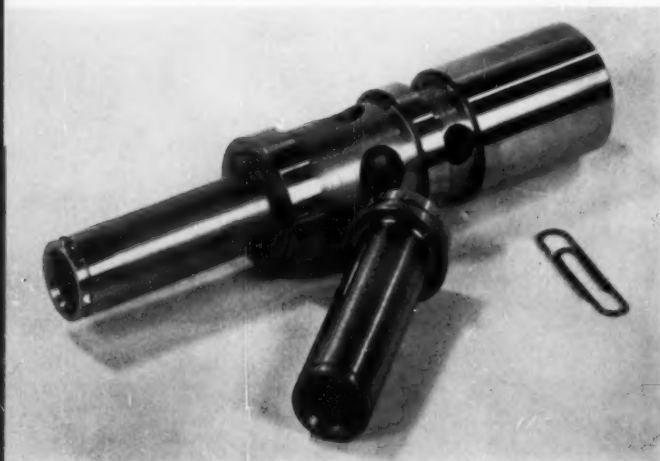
Two-Piece Valve Assembly, Made of Type 440 F Stainless, Prior to Brazing and Bright Hardening. The filler metal is a copper ring which is held in a groove in the flange after assembly. (Bendix Corp.)
